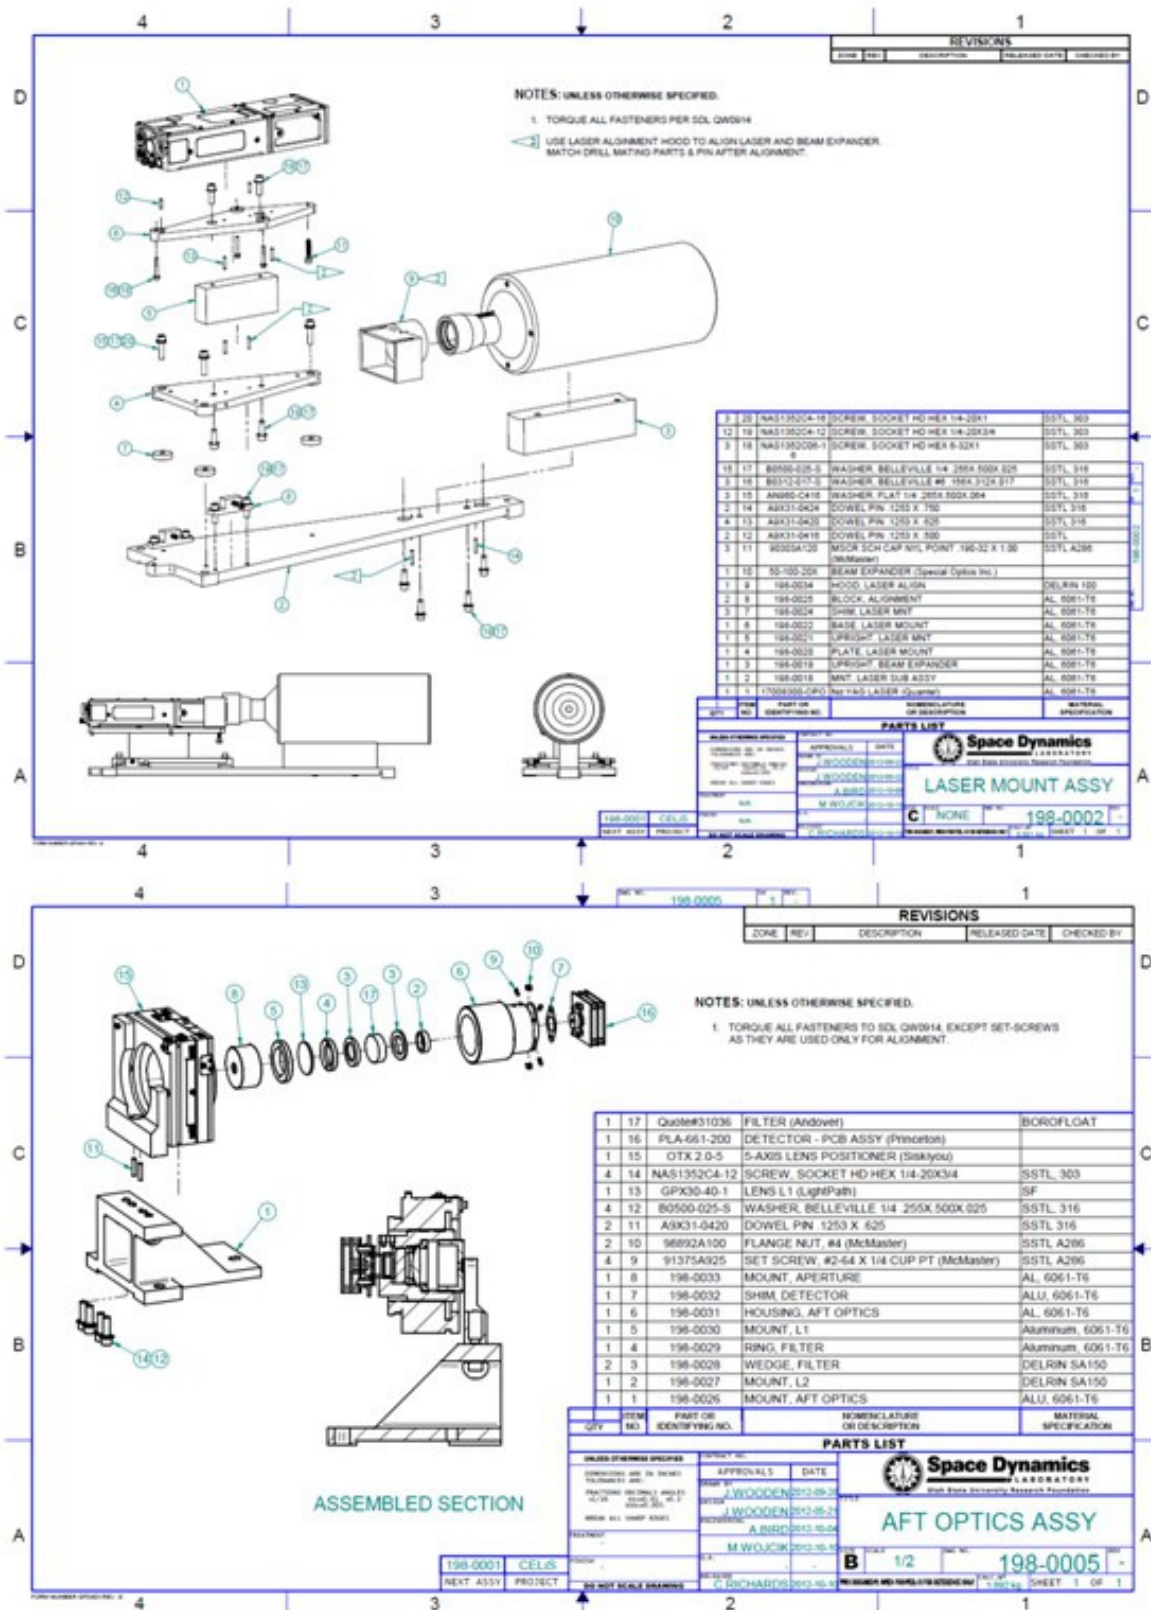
Several mechanical drawings used for assembly of CELiS.
